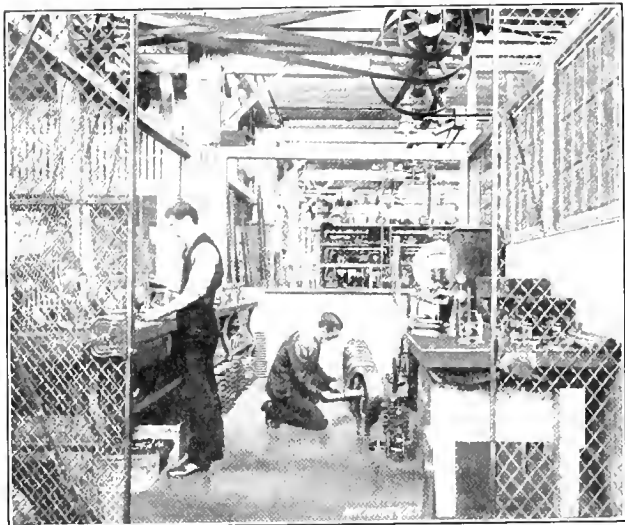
Inspecting Department. This Room is enclosed to Guard against Interruptions that might lead to Errors or Oversight on the part of the Inspector.
